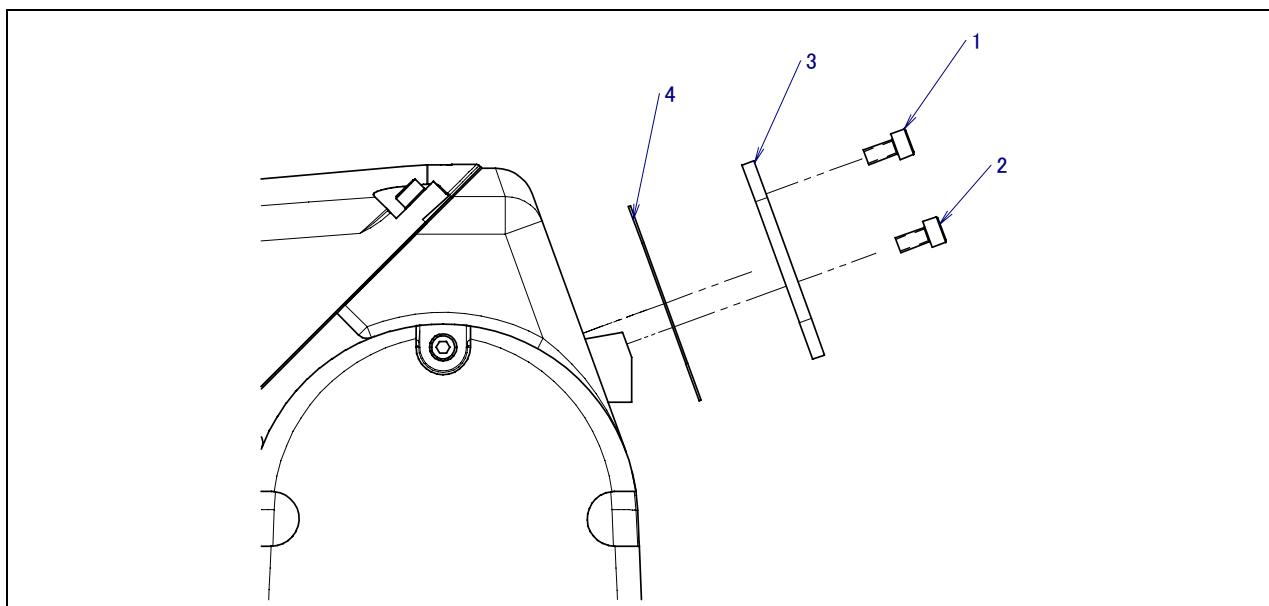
(h) Remove the cover of solenoid valve part
